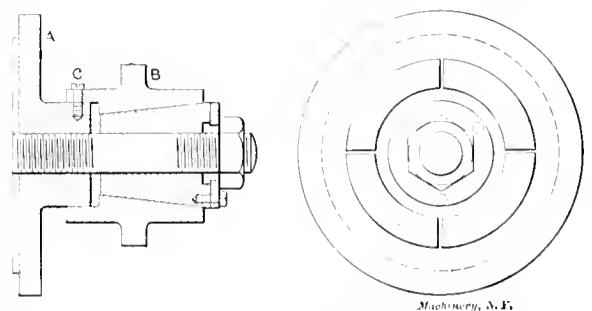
Expanding Arbor for Holding the Rings while Facing them.
